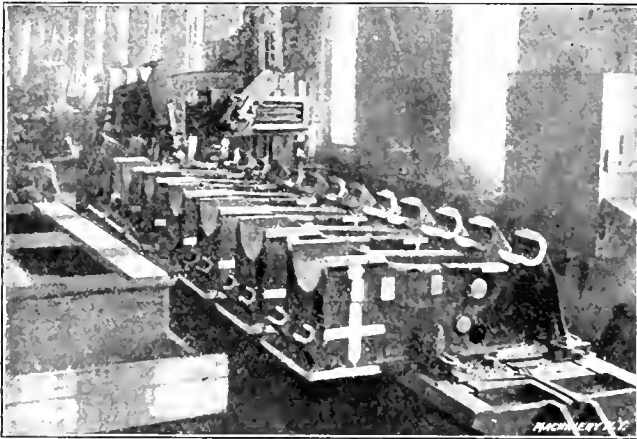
Planing the Pillow Blocks, Gear Brackets and Governor Pads with an Open Side Planer
